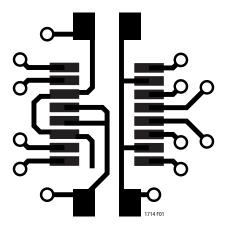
Typical LT1714 Topside Metal for Multilayer PCB Layout
